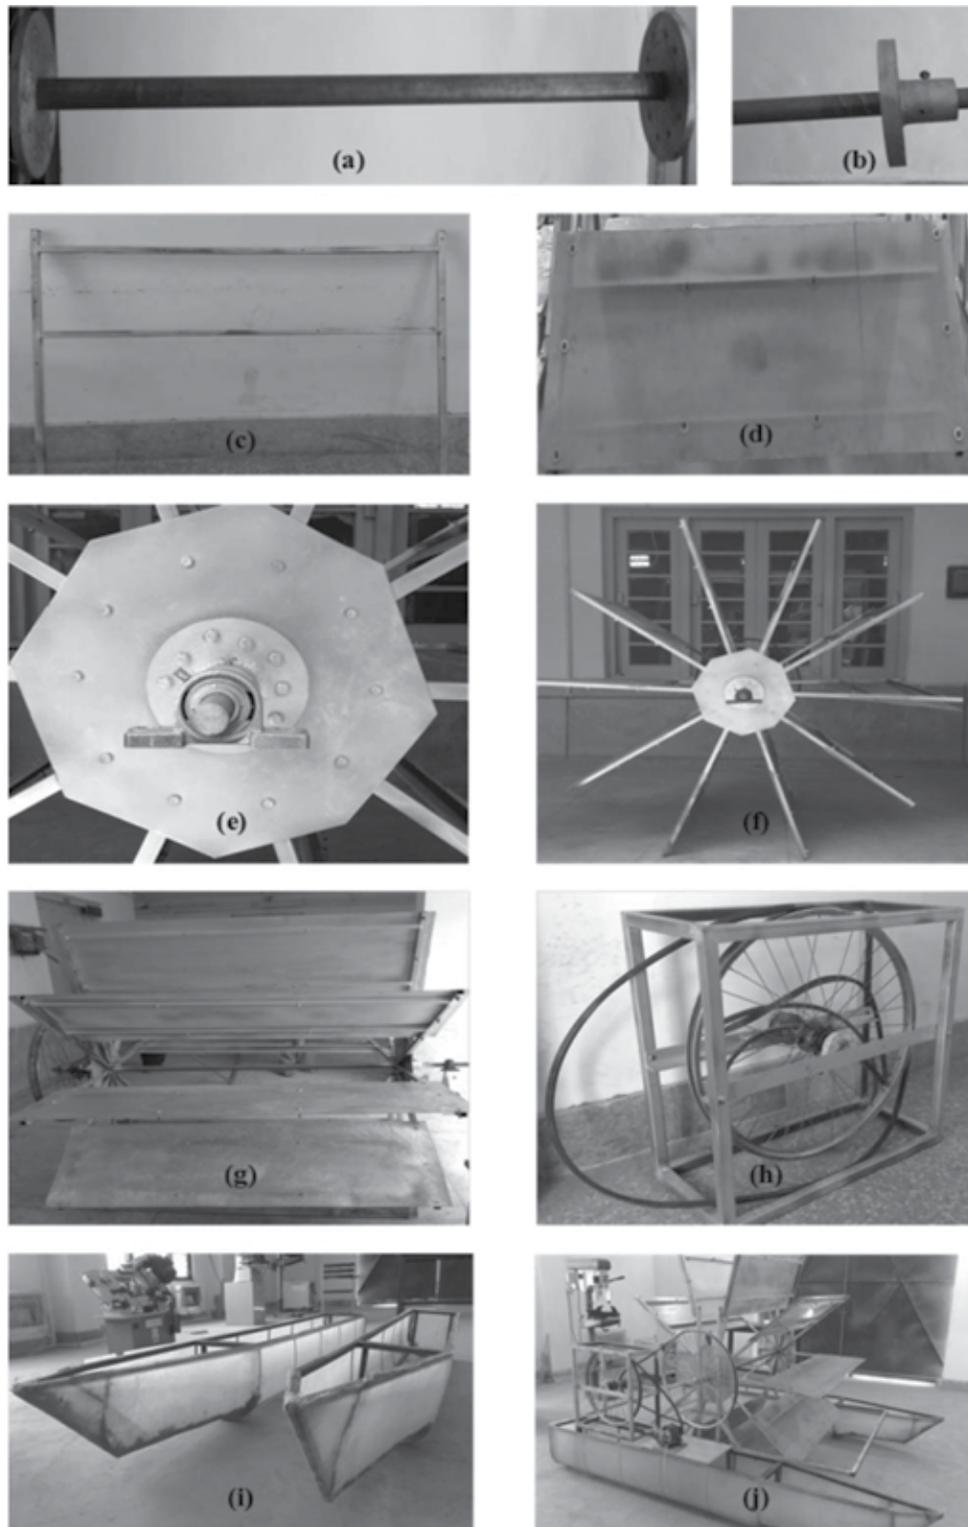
Fabrication of initial prototype floating waterwheel: (a) Shaft, (b) rotor collar, (c) blade frame, (d) blade made from fiber glass, (e) self-aligned roller bear on shaft, (f) fabricated rotor side view, (g) Fabricated rotor front view, (h) pulley box, (i) unfinished floats and (j) initial assembled prototype floating waterwheel.
